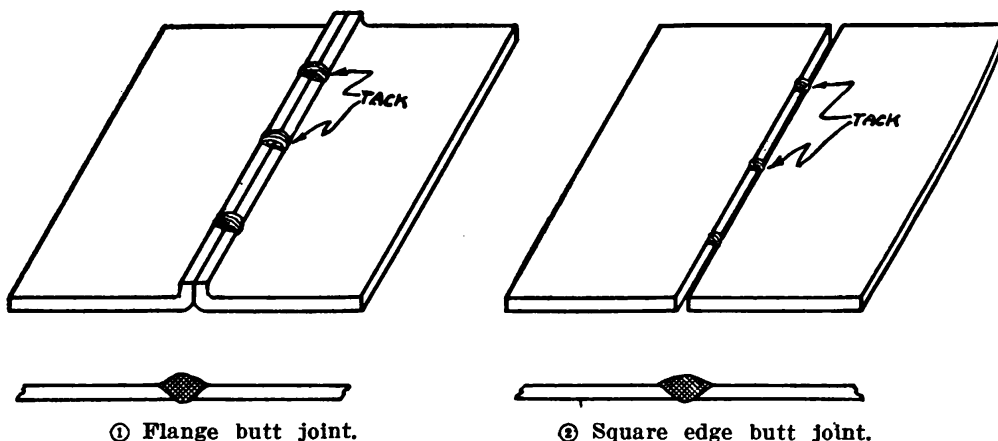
Preparation for welding butt joints in aluminum sheet.
